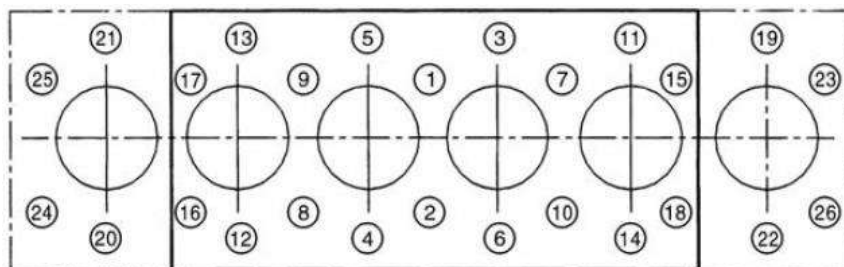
Sequence for Tightening Cylinder Head Belts
